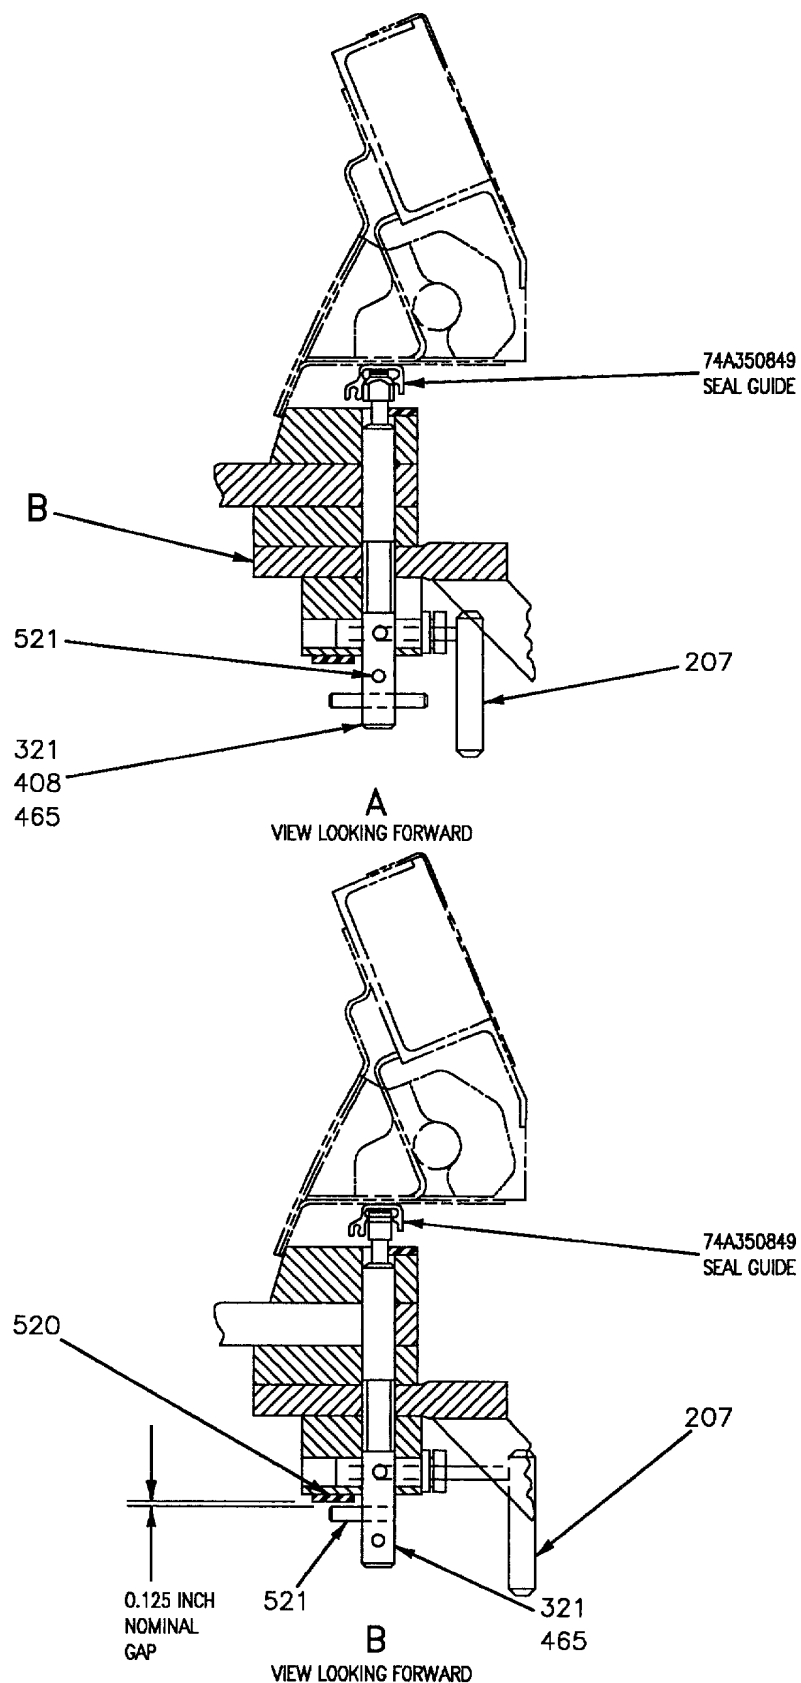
Inspection and Replacement - Seal Guide (Sheet 2)
